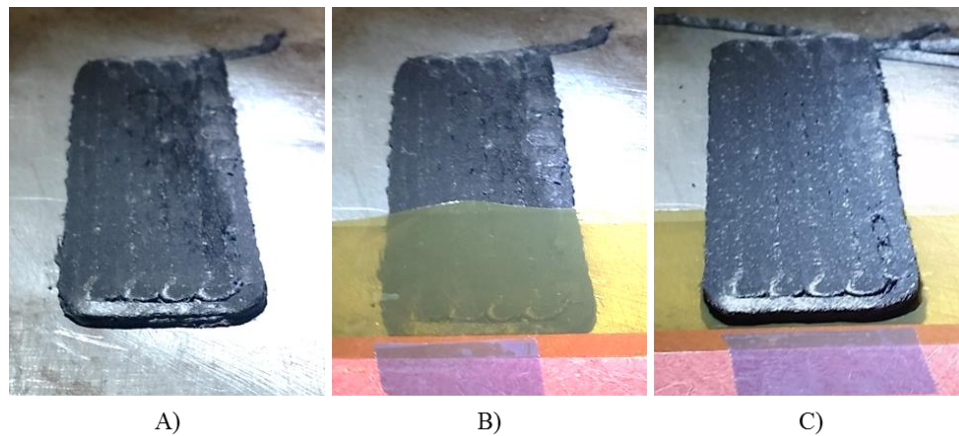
Process for introducing initial crack with a polyimide film during printing of panels utilized in the preparation of DCB specimens.
